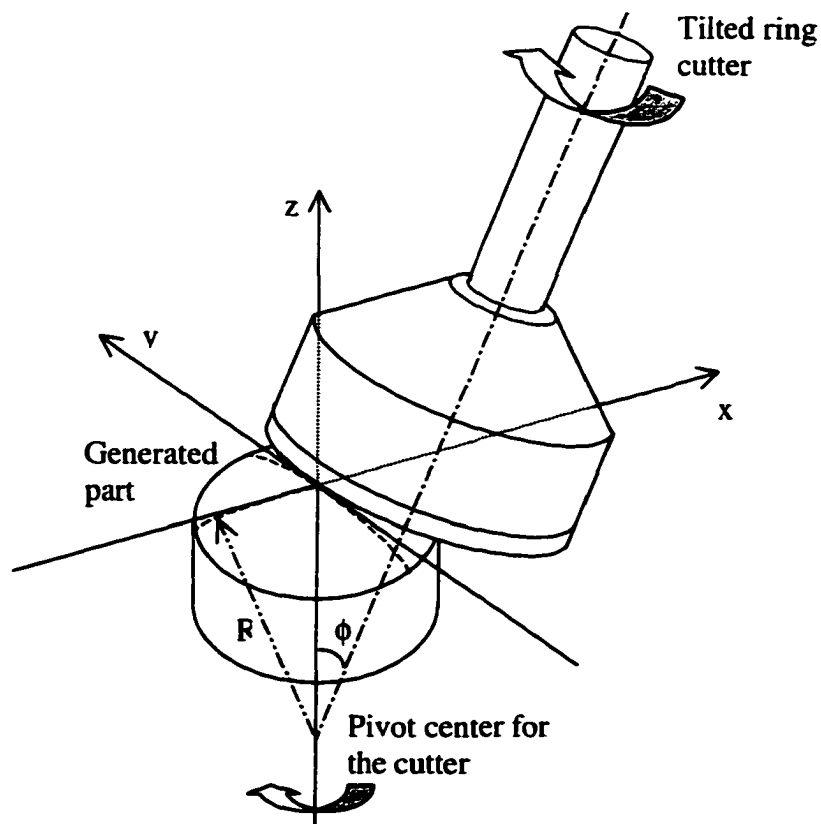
Schematic drawing of the Opticam ring grinding geometry.
